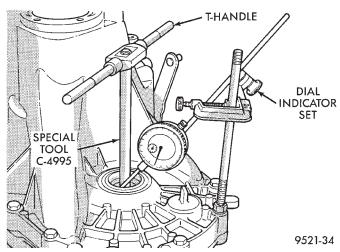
Checking Differential Bearing End Play To Determine Shim Thickness
